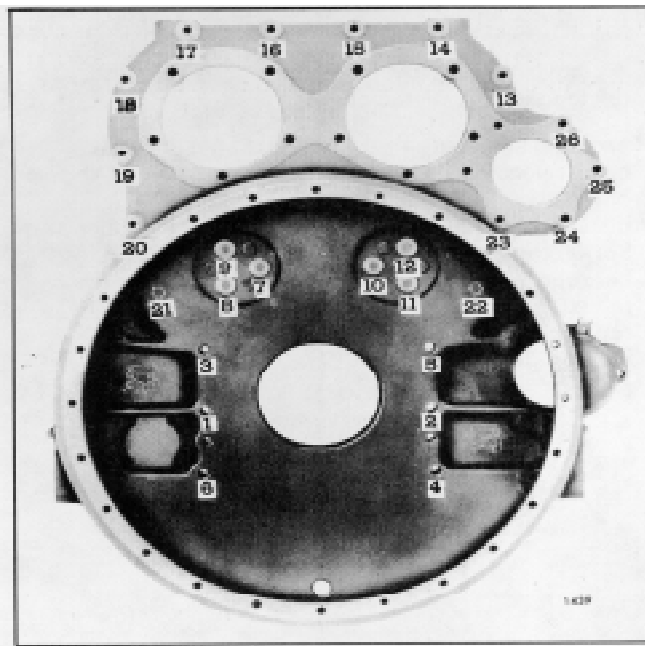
Flywheel Housing Bolt Tightening Sequence
